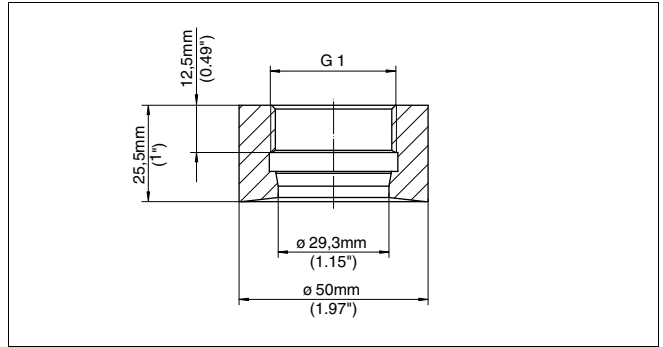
Dimensions welded socket G1 B aseptic
